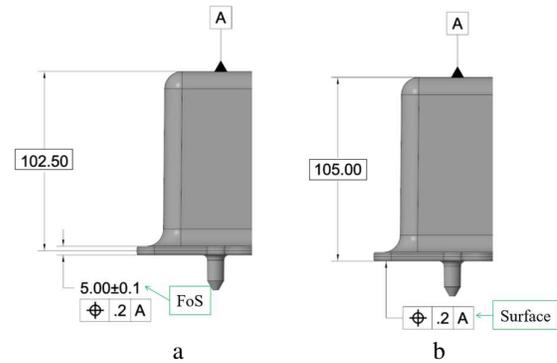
Example of a FoS and a surface tolerancing (extracted from the tool).
